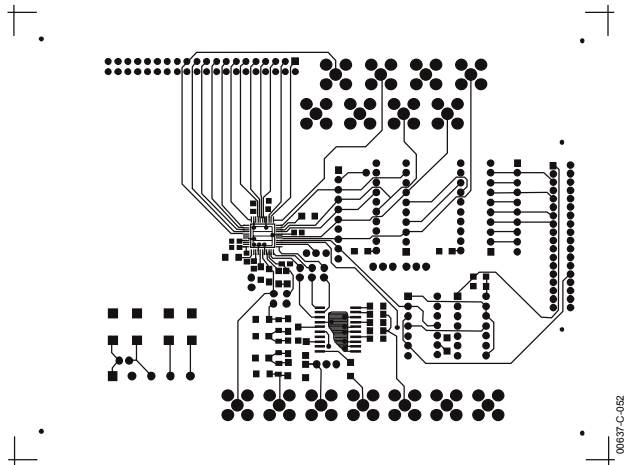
PCB Lay Out Pattern for Four-Layer AD9856 PCB Evaluation Board Layer 1 (Top)—Signal Routing and Ground Plane
